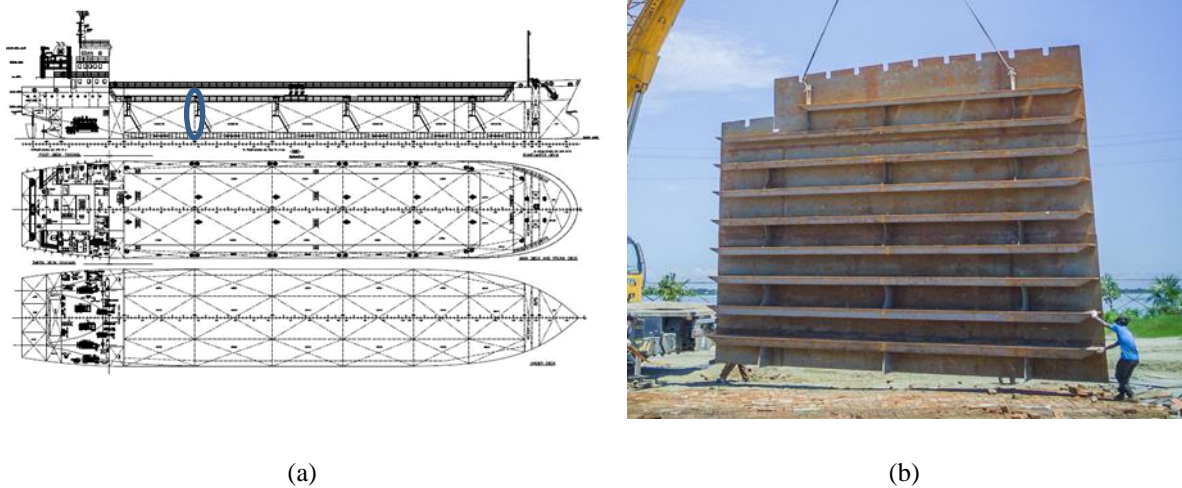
(a) Position of bulkhead in the oil tanker; (b) Figure of half of the bulkhead under construction.
